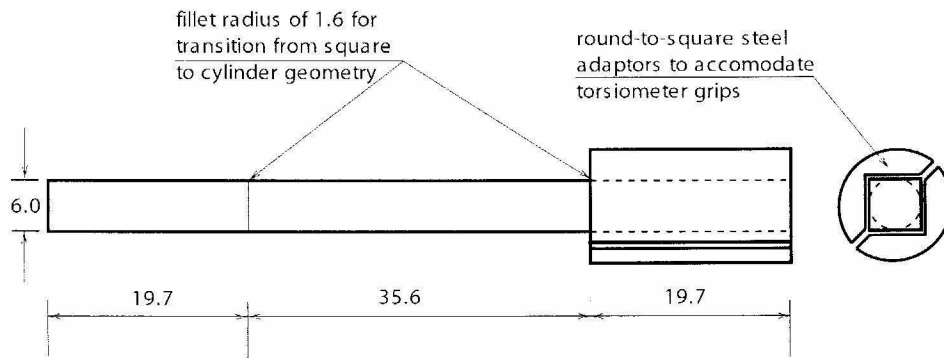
Geometry of the solid cylindrical specimen (dimensions in mm).
